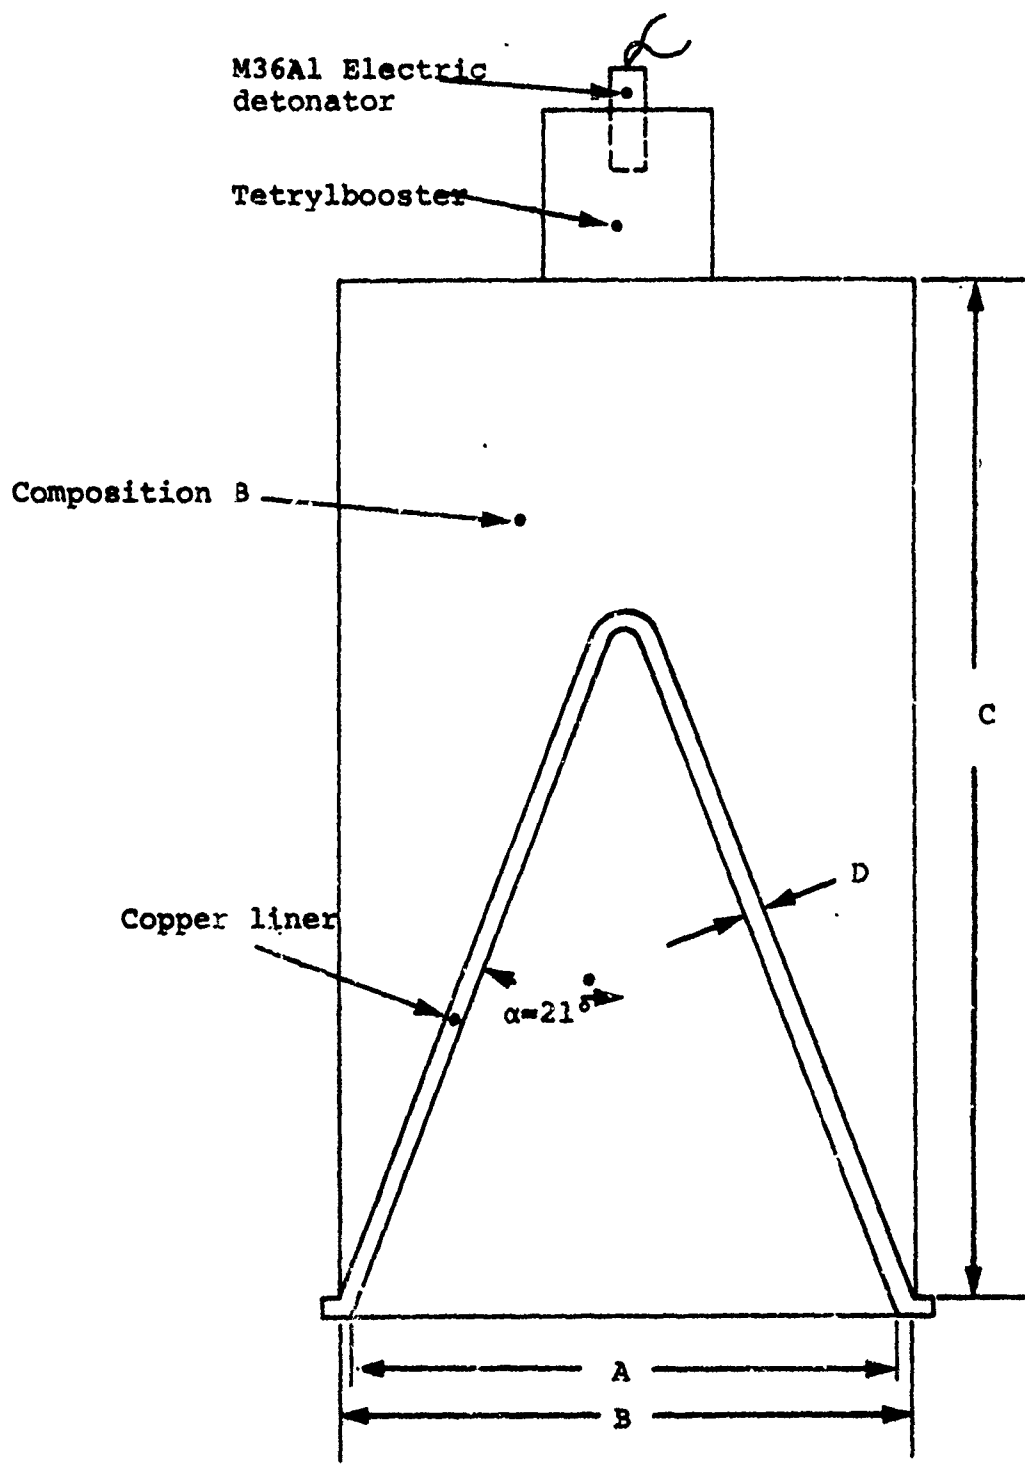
105mm Unconfined Test Charge. Dimensions are: A = 3.25 in., B = 3.40 in., C = 6 in., and D = 0.106 in.
